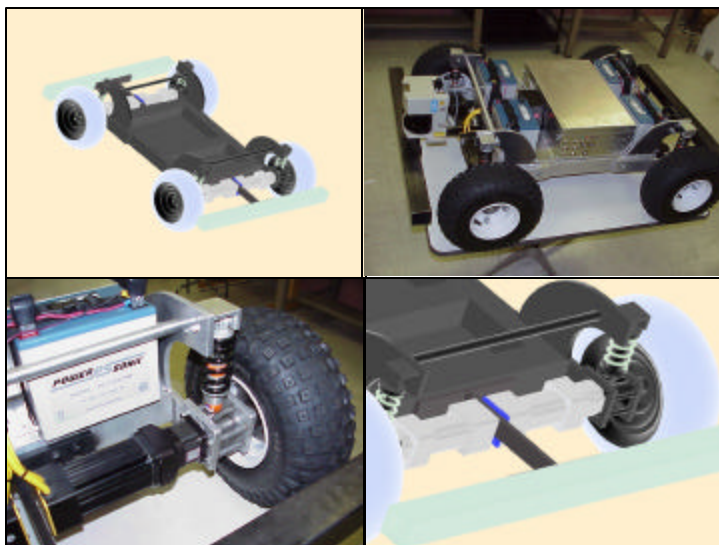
Illustrates Prototype Pro/E Model and Actual Physical Design of TIGER.
